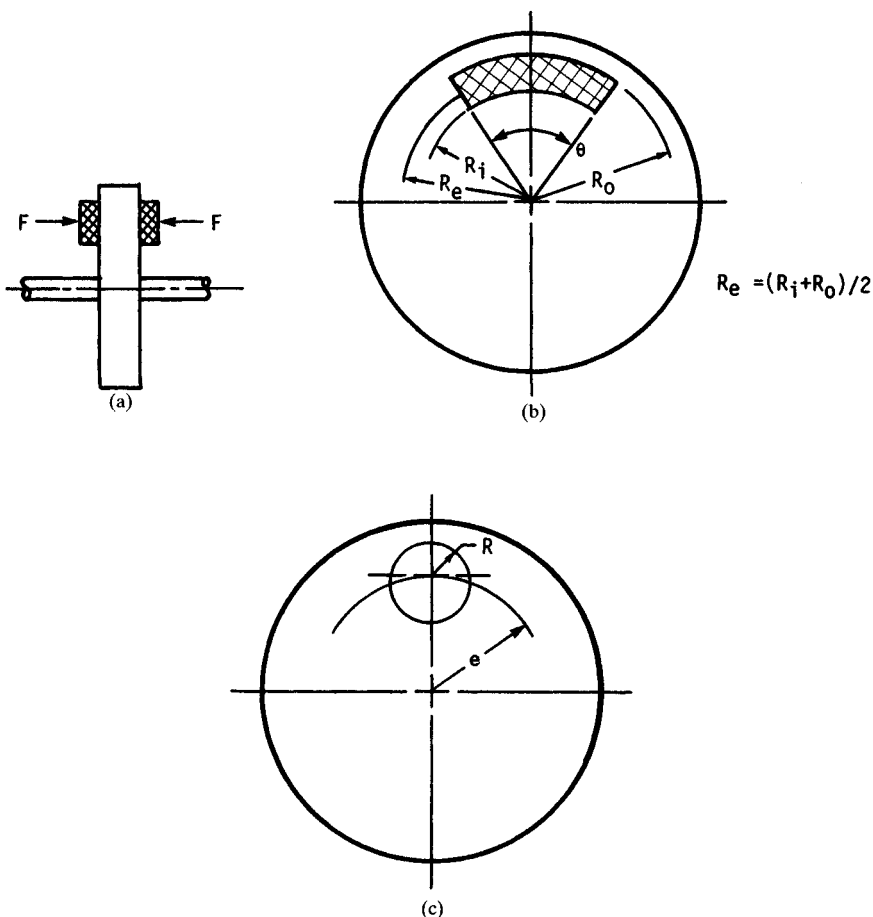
Caliper disk brake. (a) Principle of operation; (b) annular pad; (c) circular pad.
